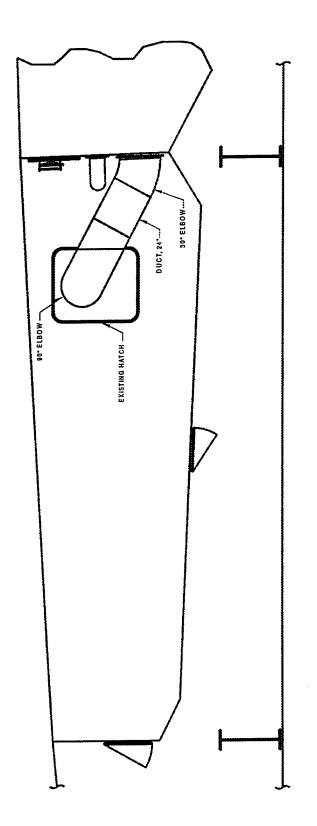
Plan vew of temporary AMR frame bay ducting in Fan Room
